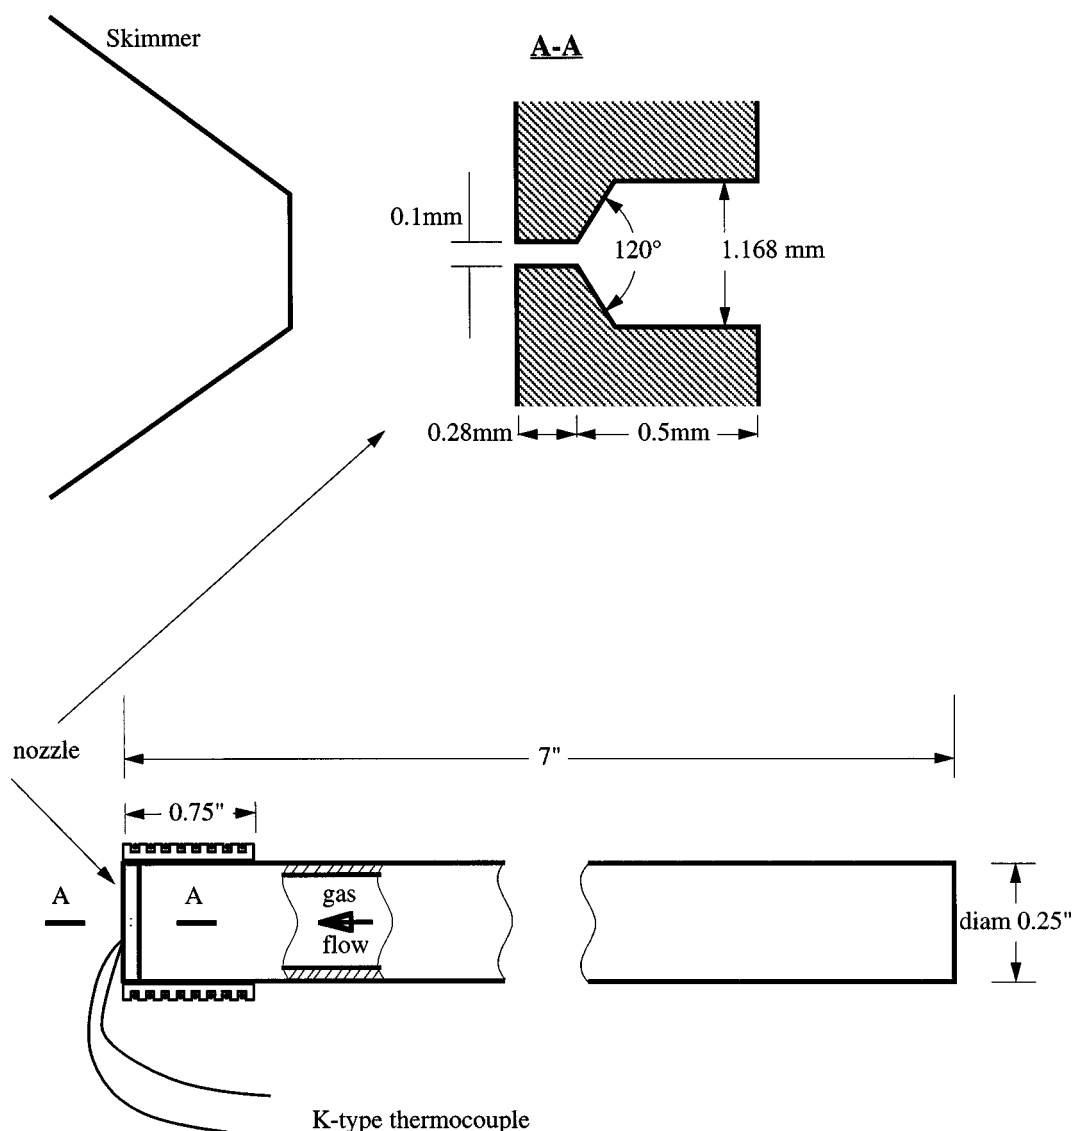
Schematic drawing of the nozzle setup (a case of metal nozzle). The lower picture shows the stainless-steel tube, to which the nozzle button made of catalytic material is welded or crimped. The upper picture presents the cross section of the button with corresponding dimensions and nozzle alignment relative to a skimmer.
